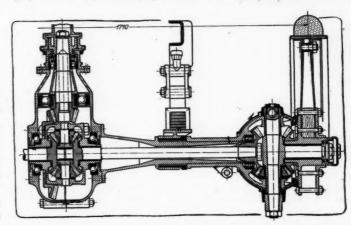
Front axle drive (horizontal section) and front wheel gear (vertical section) in Ehrhardt car
